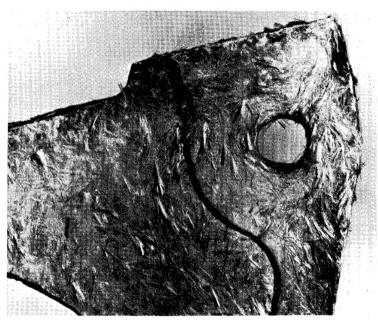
Crankshaft rear seal housing showing fiber orientation around molded-in fixing holes
